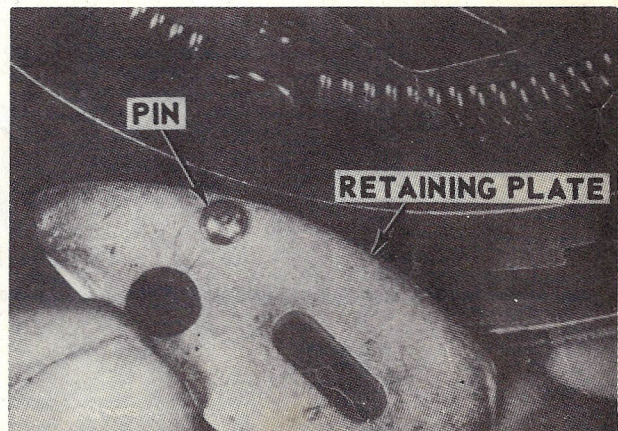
Install clutch spring (4—Fig. MC6-15) so that spring ends will contact locating pin in clutch spring retaining plate.
